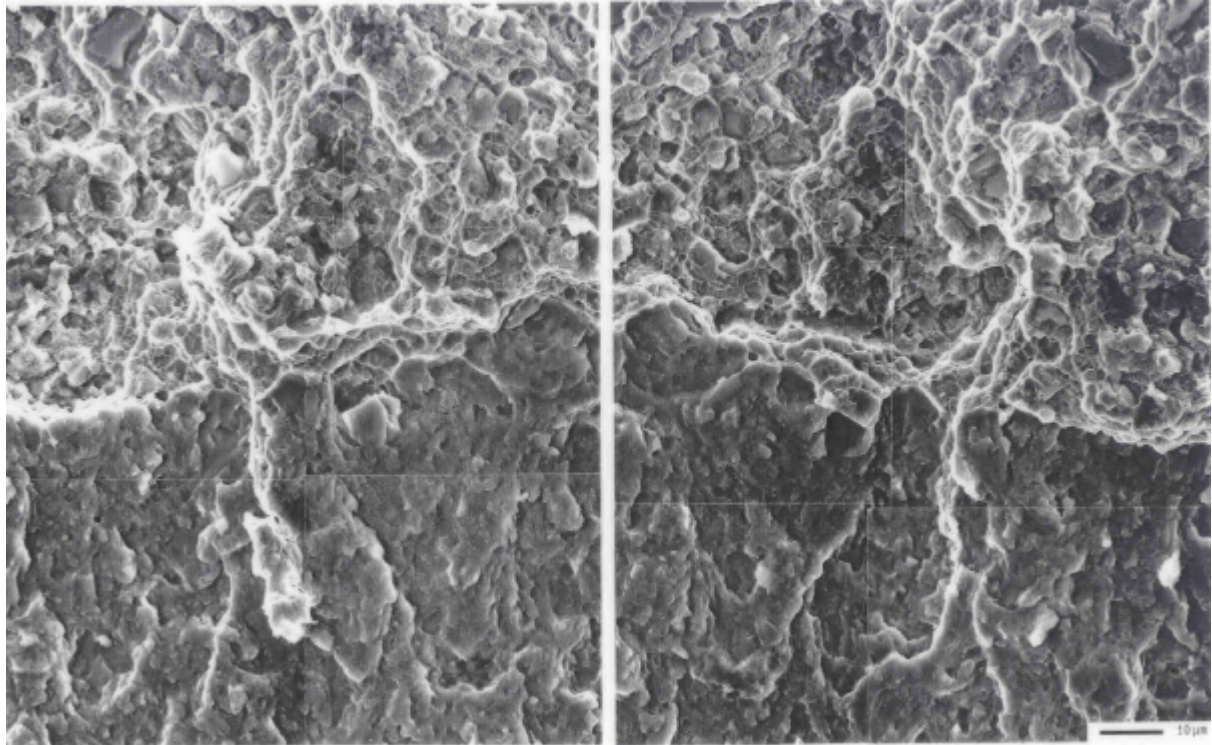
Matching fracture surfaces of the broken fracture toughness specimen, showing the pre-crack region and overload fracture surface
